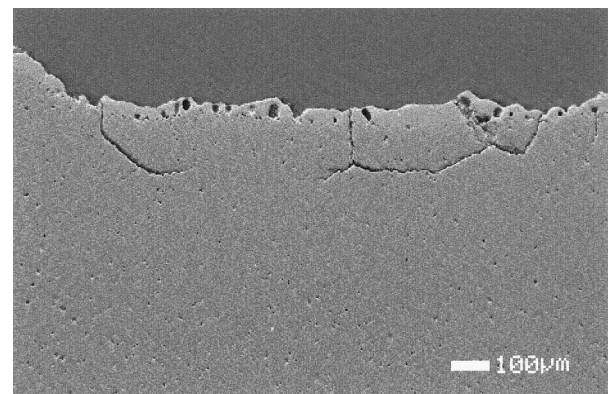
Sub-surface near-horizontal cracks running almost parallel to the surface after machining under arcing conditions.
